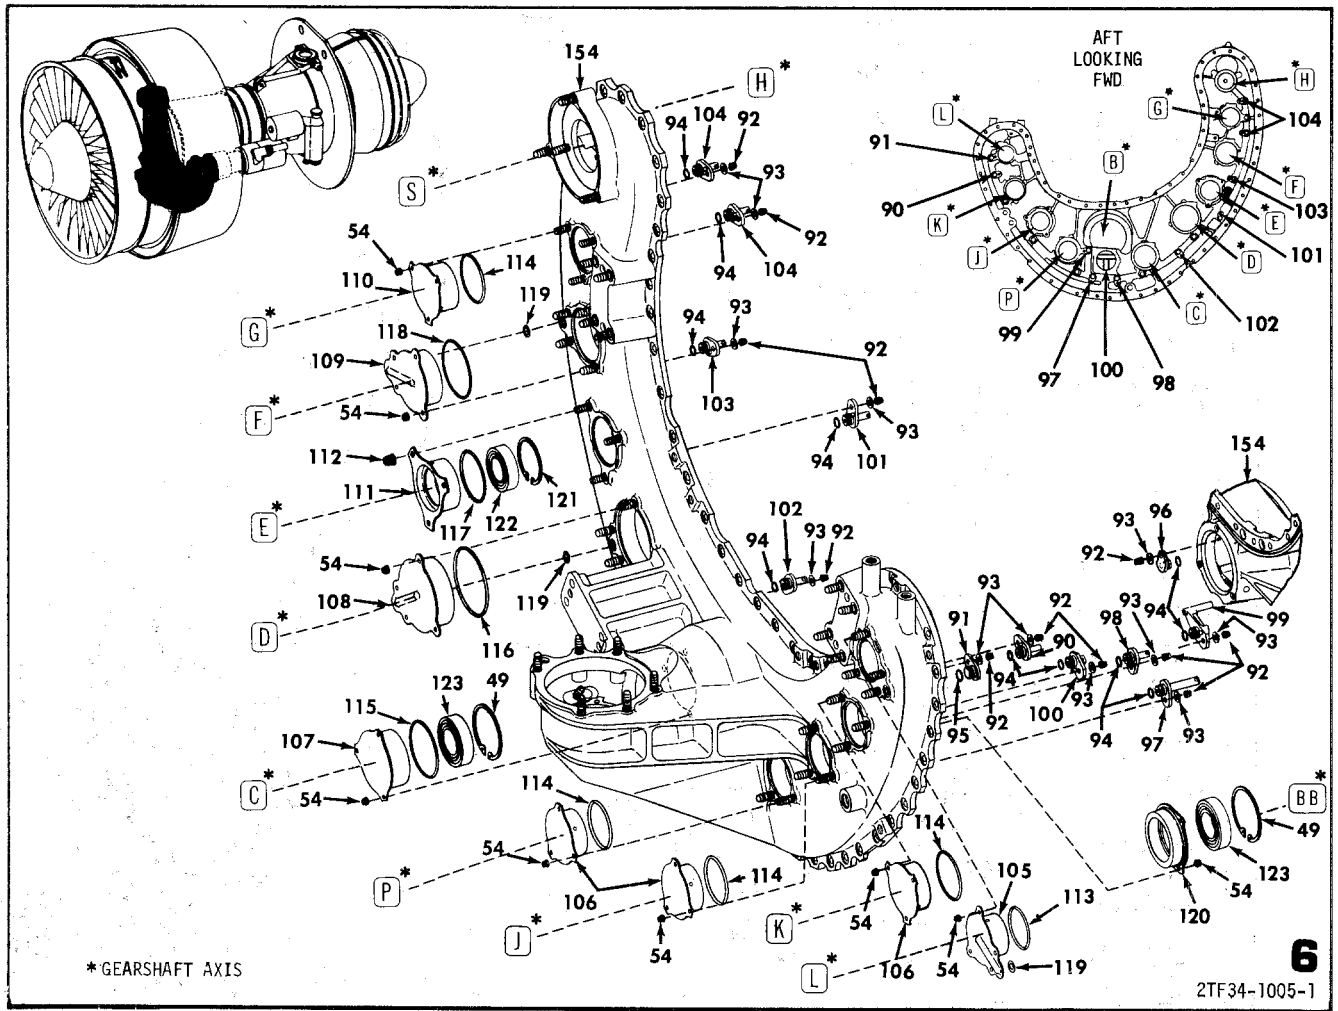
ACCESSORY DRIVE GEARBOX
